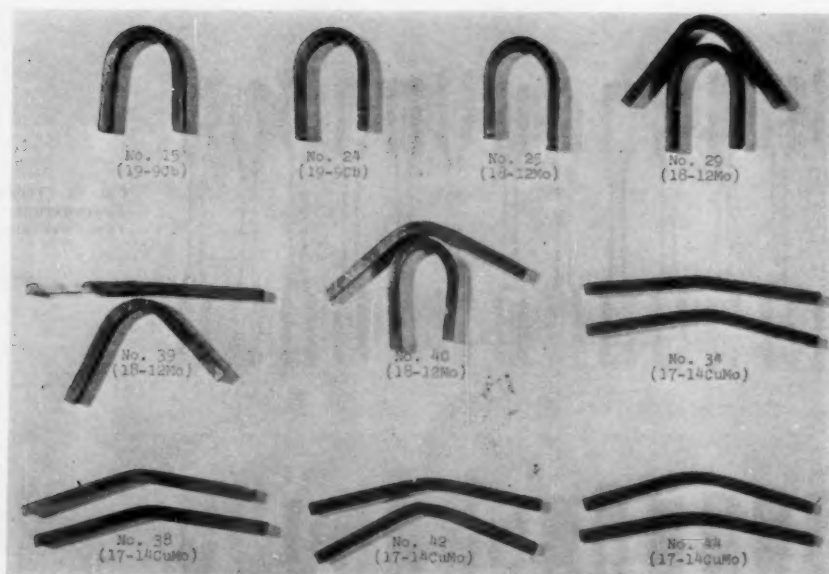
TYPICAL EXAMPLES OF WELD SIDE-BEND TEST SPECIMENS
